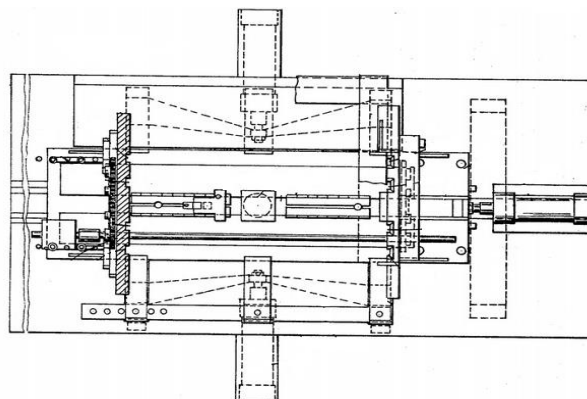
Apparatus for Assembly of Tube and Center Radiator Cores
